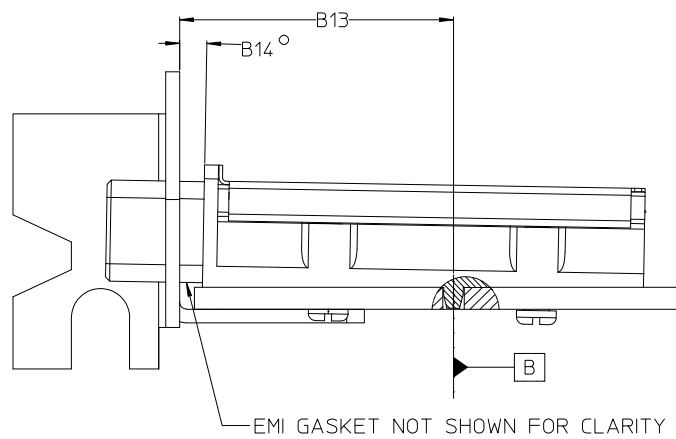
x4 PCI Expansion Card (1°) EMI Guide Housing Assembly Side View
